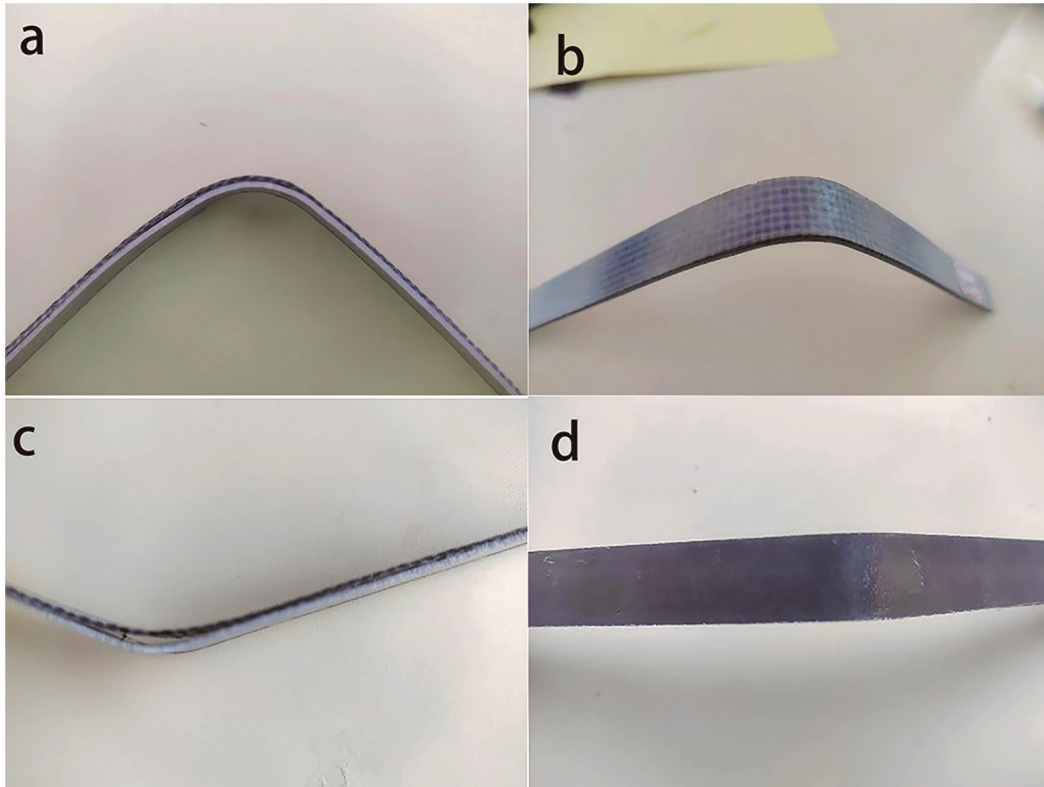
Macrostructure of molded CARALL after the three-point bending test: (a) The metal layer is layered on top; (b) Cracks when metal layer is on top; (c) The fiber layer is layered on top; (d) Necking when fiber layer on top.
